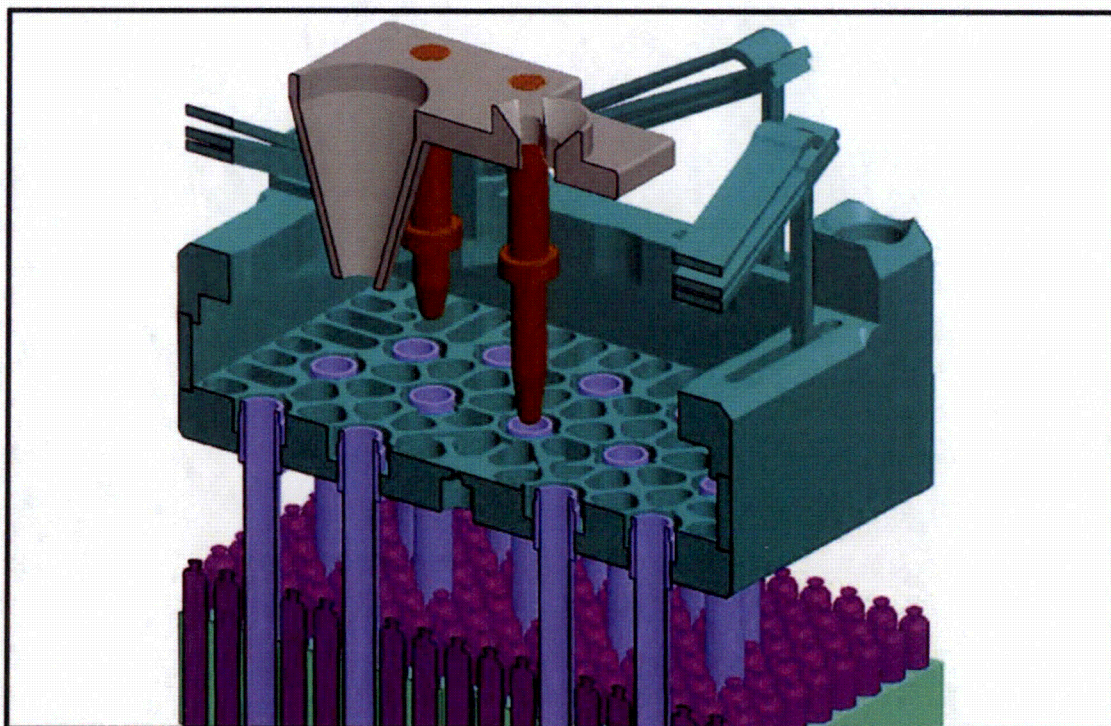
Funnel Guide Assembly – Sectional View
